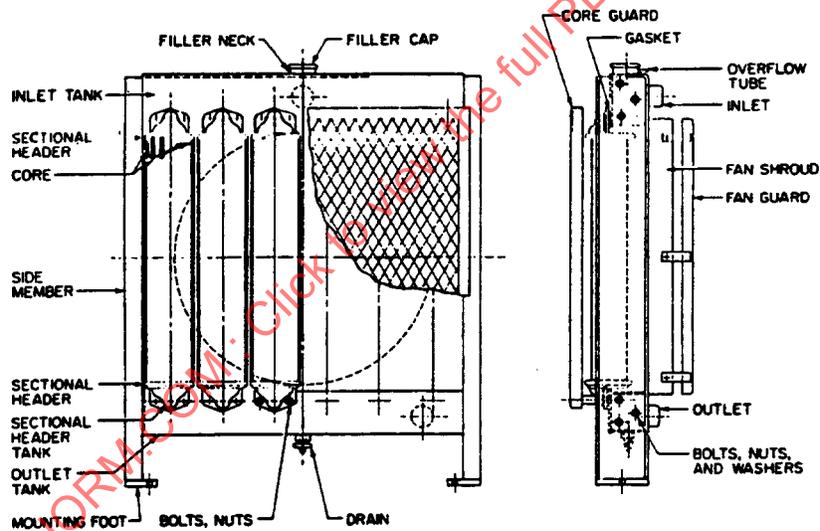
CAST OR FABRICATED TYPE (SECTIONAL CORE) RADIATOR
